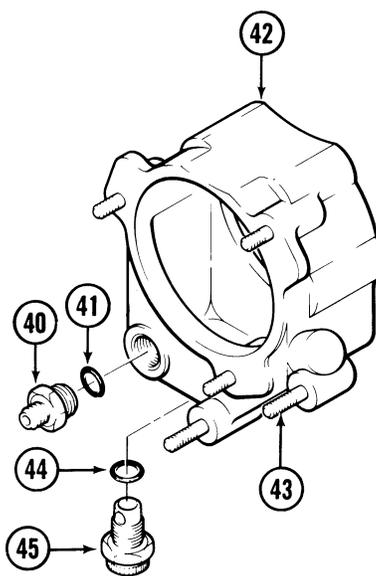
Freewheeling Assembly (206-040-230) – Overhaul (Sheet 1 of 2)
